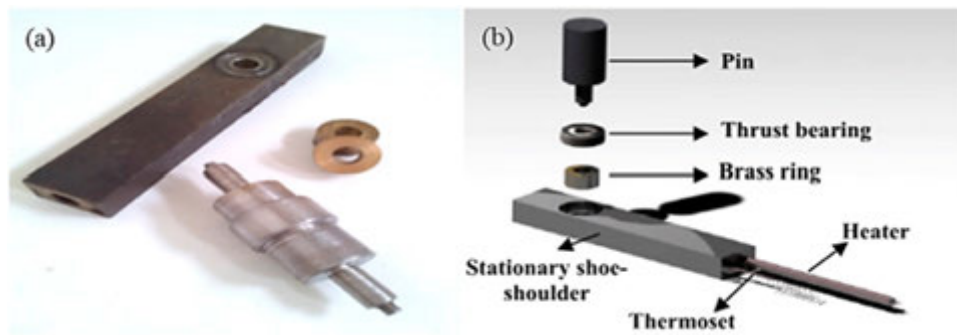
(a) Actual picture and (b) Schematic illustration of the FSW tool. Reproduced from Laieghi, H., Alipour, S., Mostafapour, A., 2019a. Heat-assisted friction stir welding of polymeric nanocomposite. *Science and Technology of Welding and Joining* 25, 56–65. Available at: <https://doi.org/10.1080/13621718.2019.1610613>.
